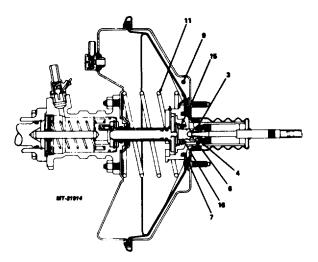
DPB Booster Vacuum Booster in Releasing Position.
